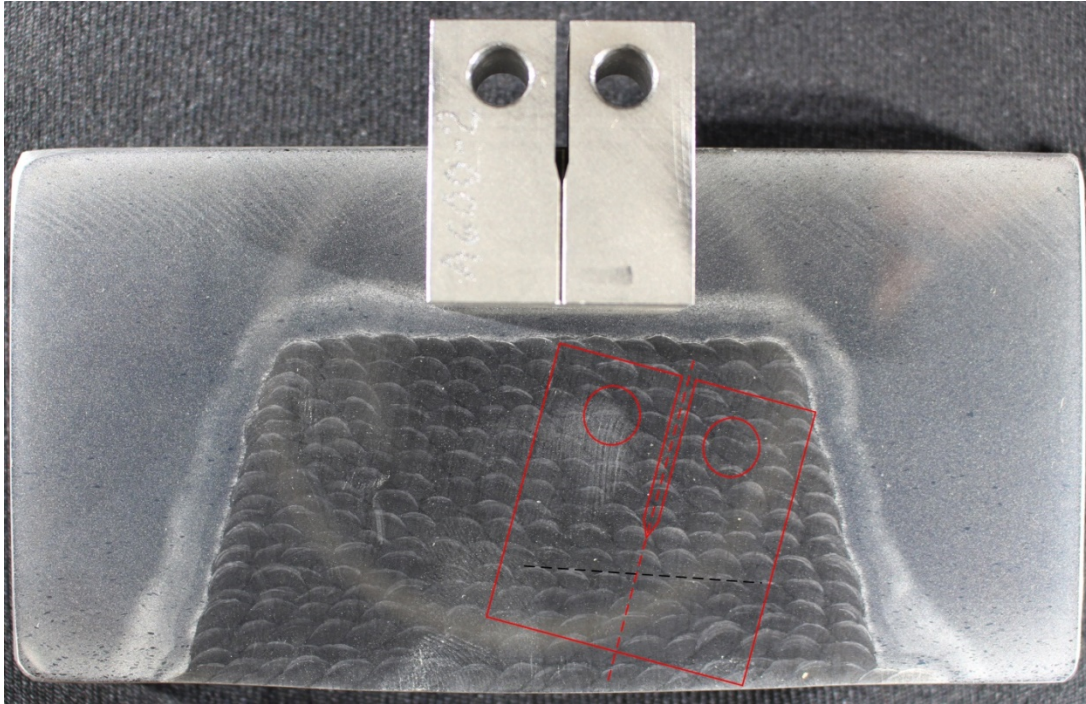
Alloy 152M weld produced by IHI and CT specimen positioning (red). The black dotted line indicates the separation between two filler heats; the first heat was abandoned because according to the WPS it showed “poor weldability and many spatter was generated during welding”.
